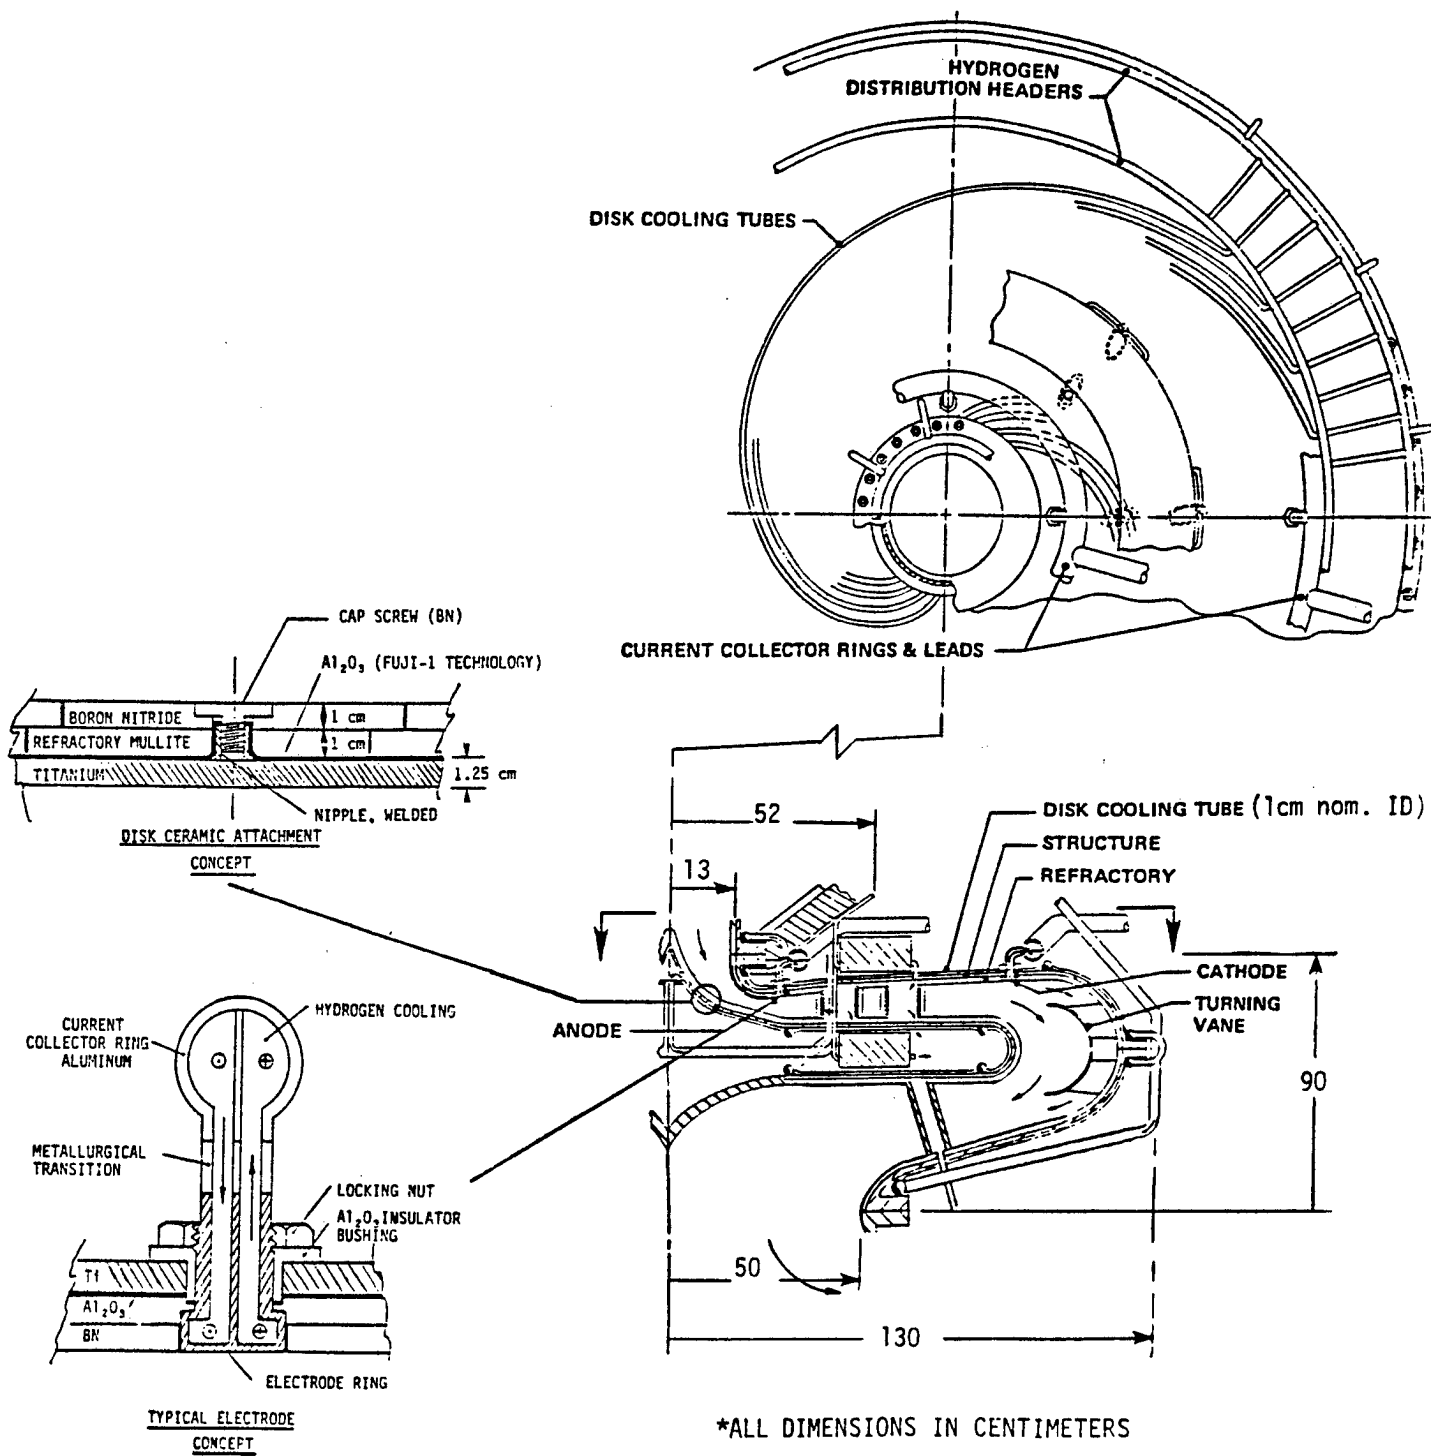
Layout and Overall Dimensions of the Disk MHD Generator
